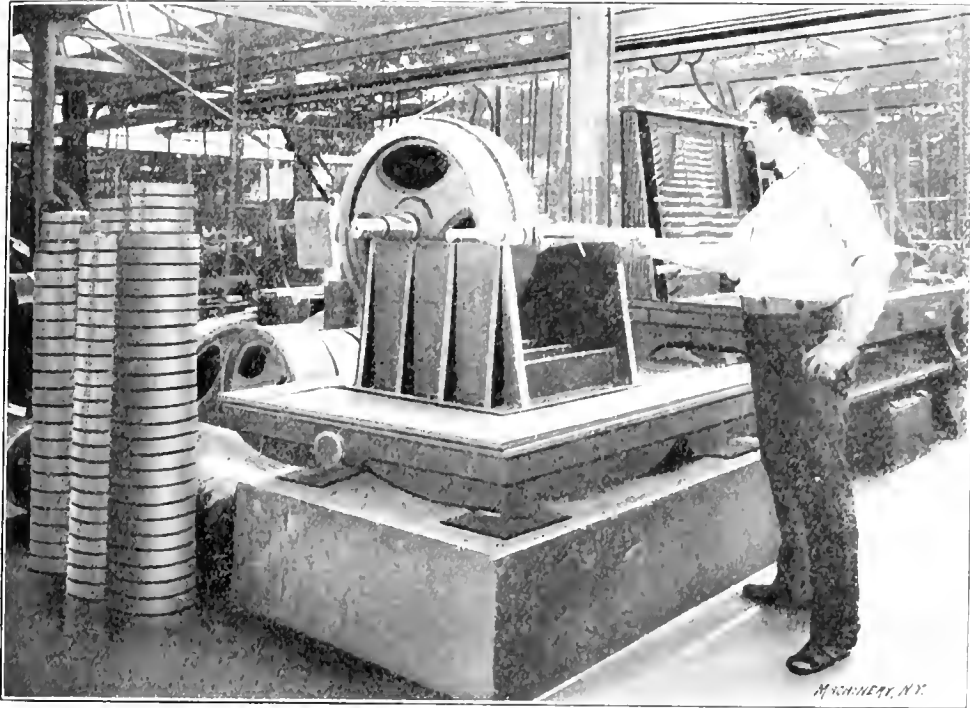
Testing the Spiral Gears and Pinions to see that Shafts are parallel and in same Plane
